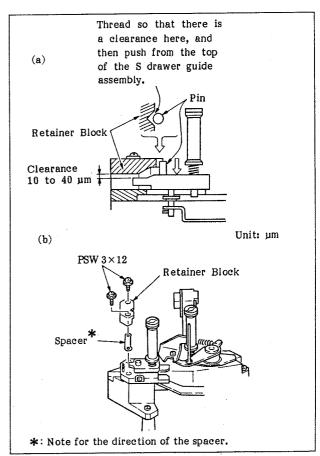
Adjustment of the Clearance between the Retainer Block and the S Drawer Block
